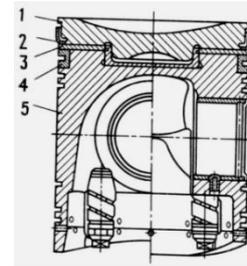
Piston with heat pad and inseparable heat ring: 1 - head; 2 - inseparable heat ring; 3 - thermal insulation; 4 - ring holder; 5 - piston
